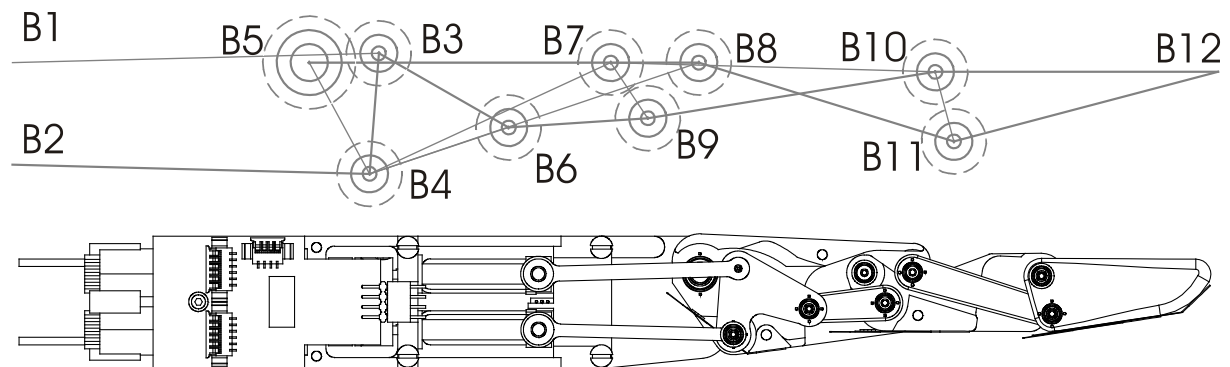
Little Mini Motor Finger Linkage Geometry and Model Design
